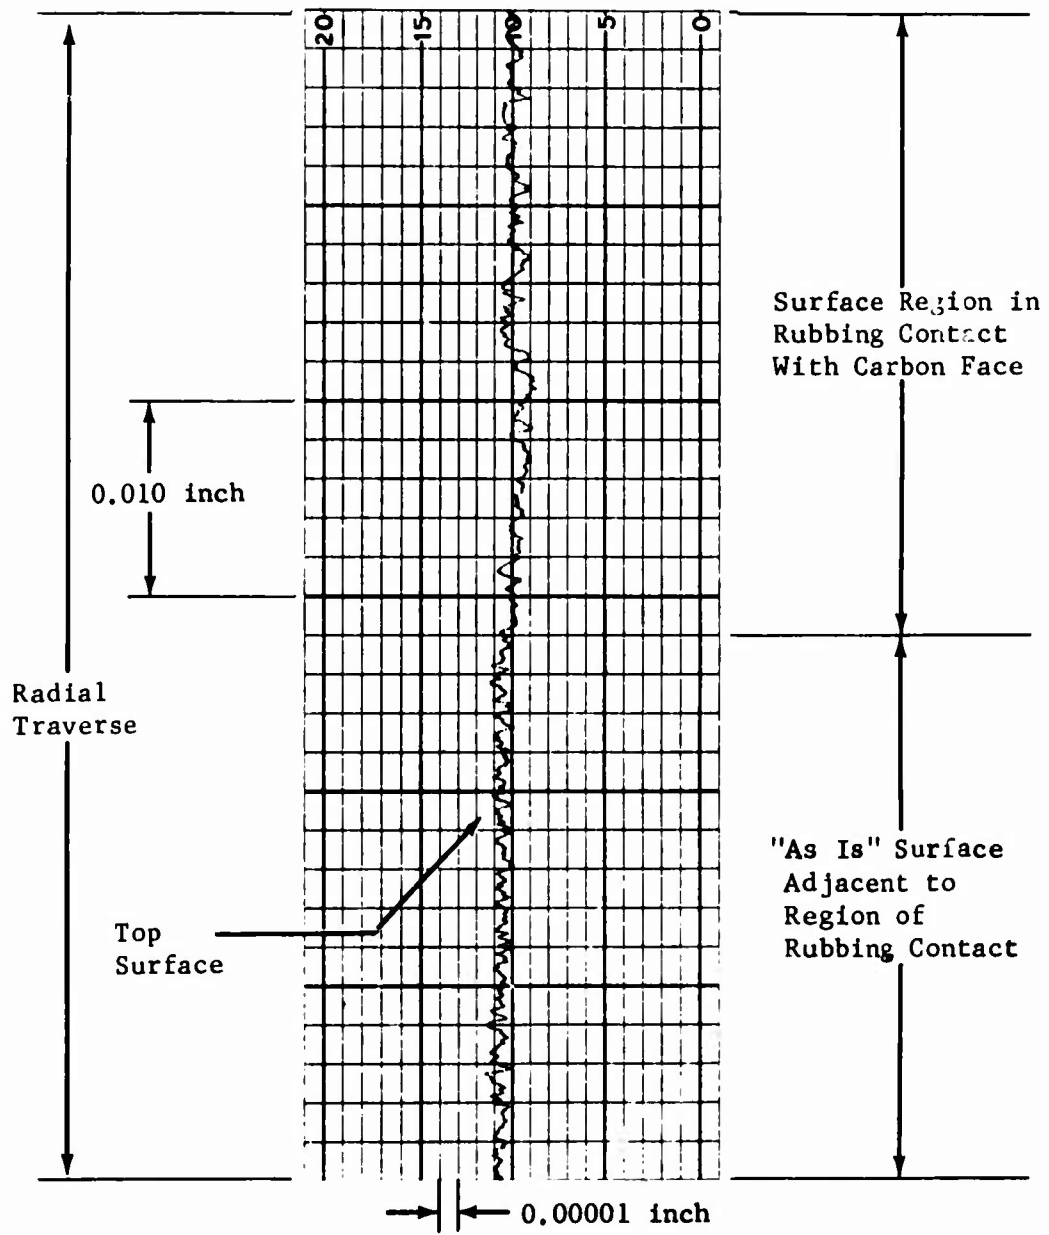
Carbon-Face Seal Surface Condition of Rotating Component.
